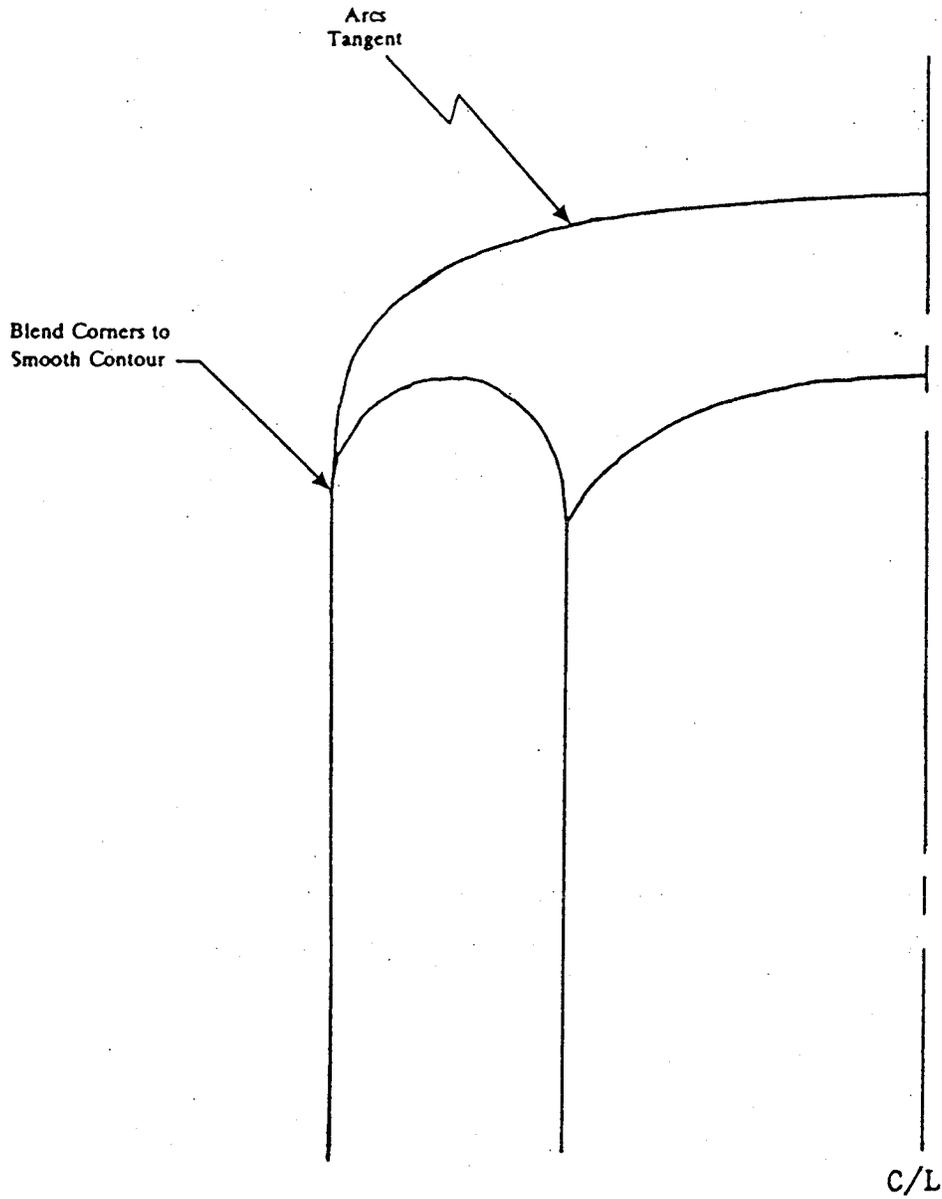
Plan D-83 – AREMA Contour Blending of Corners
